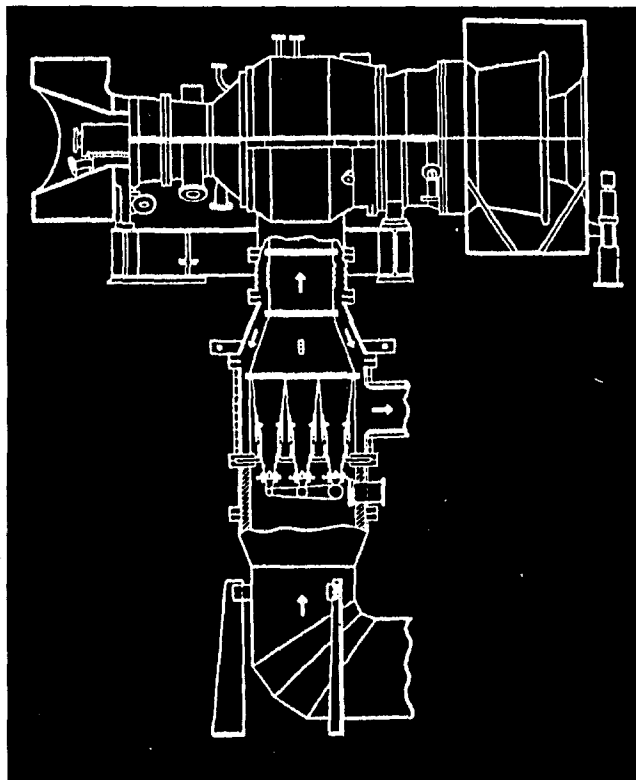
The W151 gas turbine adapted to second-generation PFBC with topping combustor
